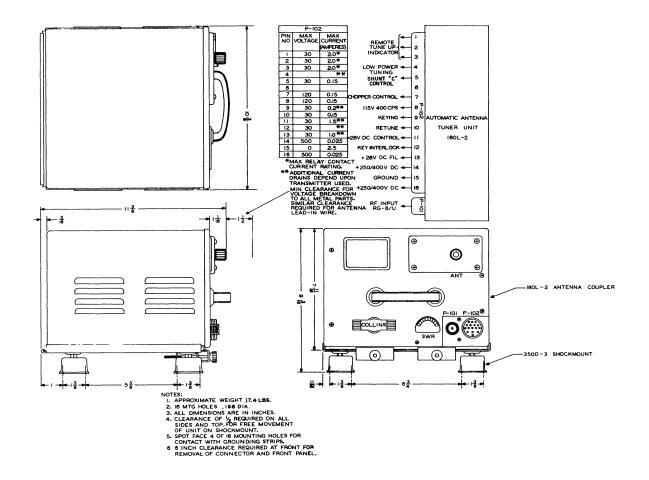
Antenna Coupler 180L-2, Outline and Mounting Dimensions
